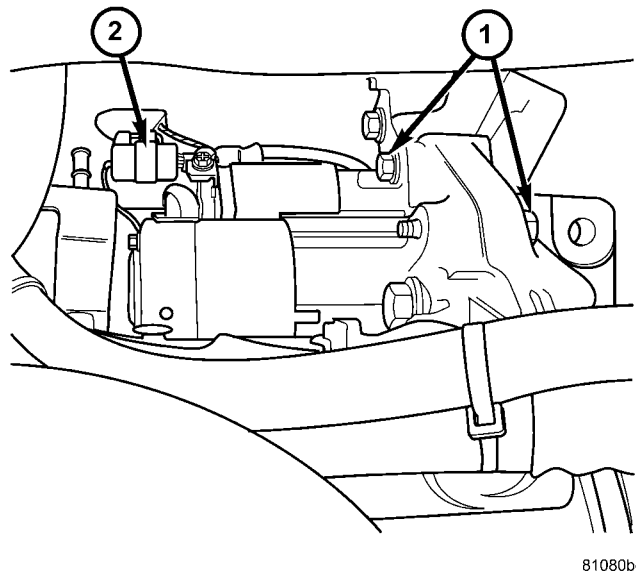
MOUNTING BOLTS & ELECTRICAL CONNECTIONS
